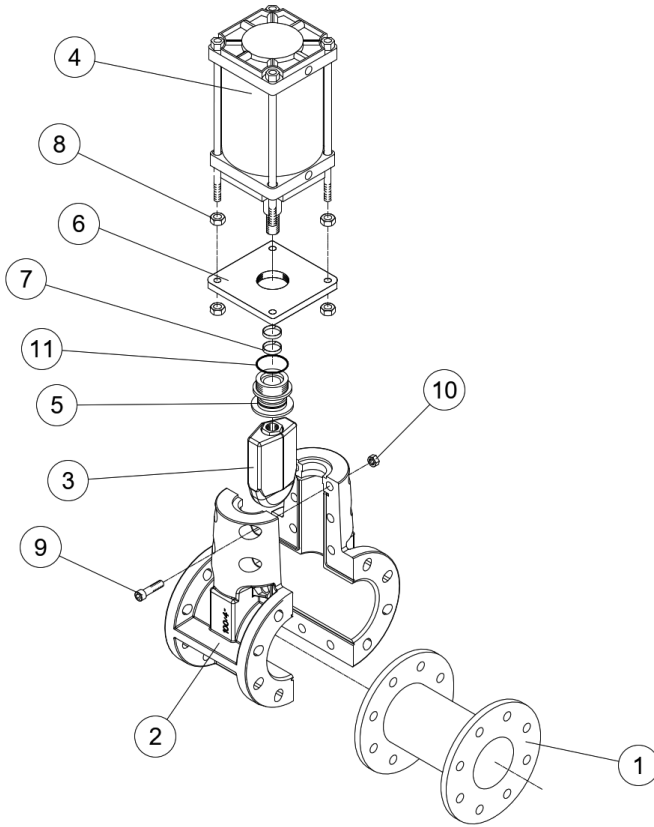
Exploded view of PVEG valve with pneumatic actuator.
